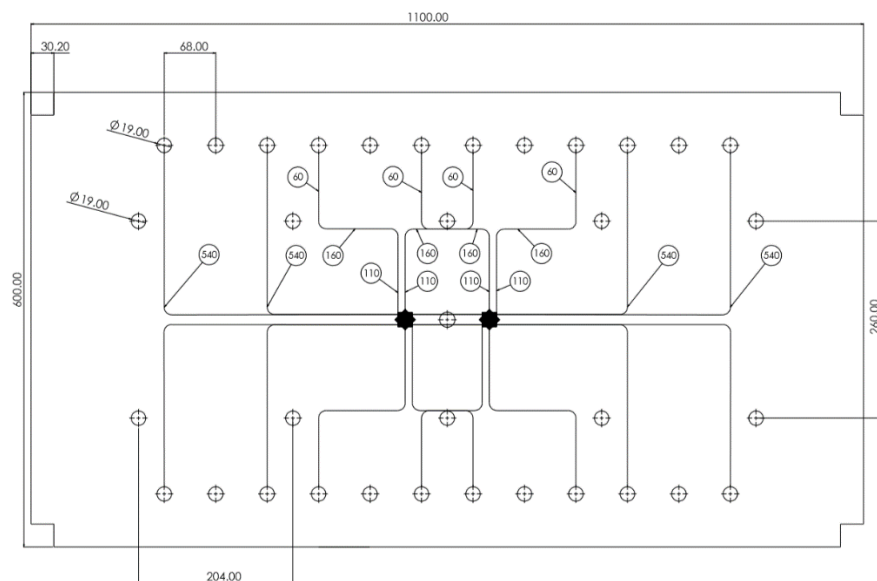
Technical drawing and actual transfer lines of the bottom of the SMBR.
